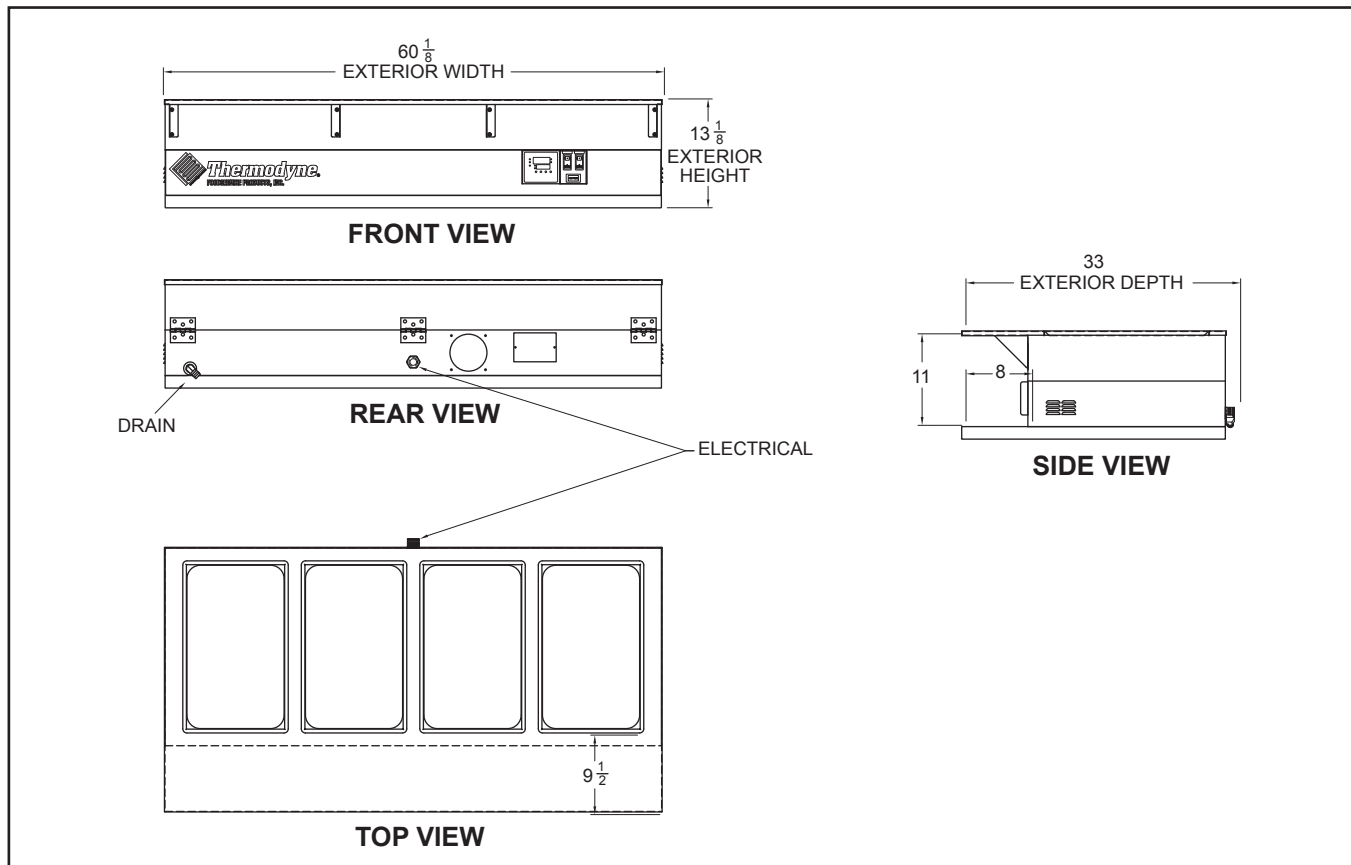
Outline Dimensional Drawing, 744HW-CT Tabletop
